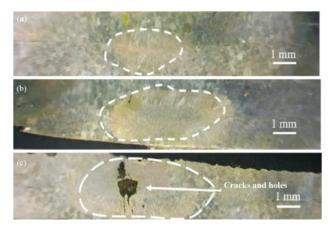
Macroscopic appearance of spot-weld joints
